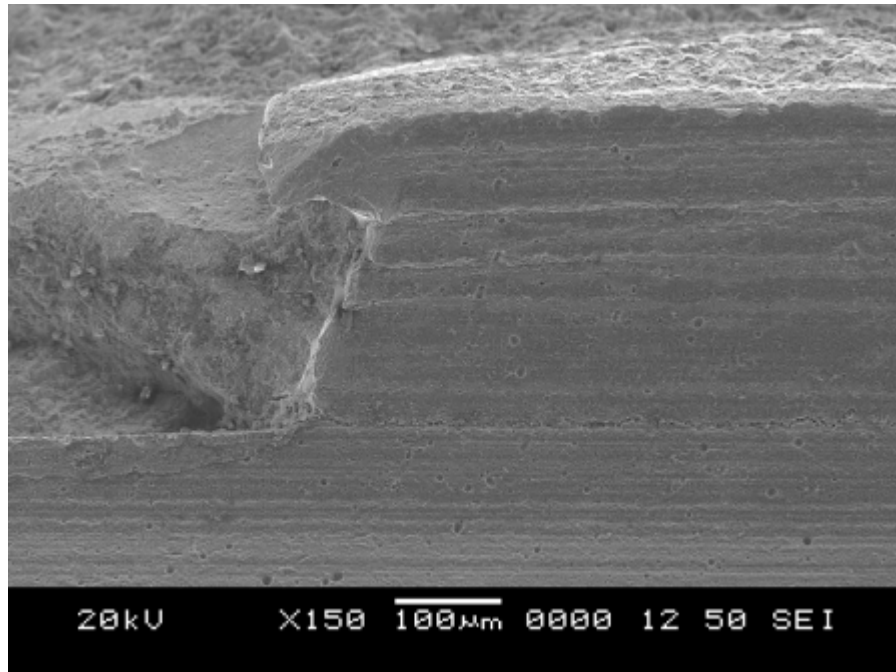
Tooth 29 root, gear half, coast side tool marks.
